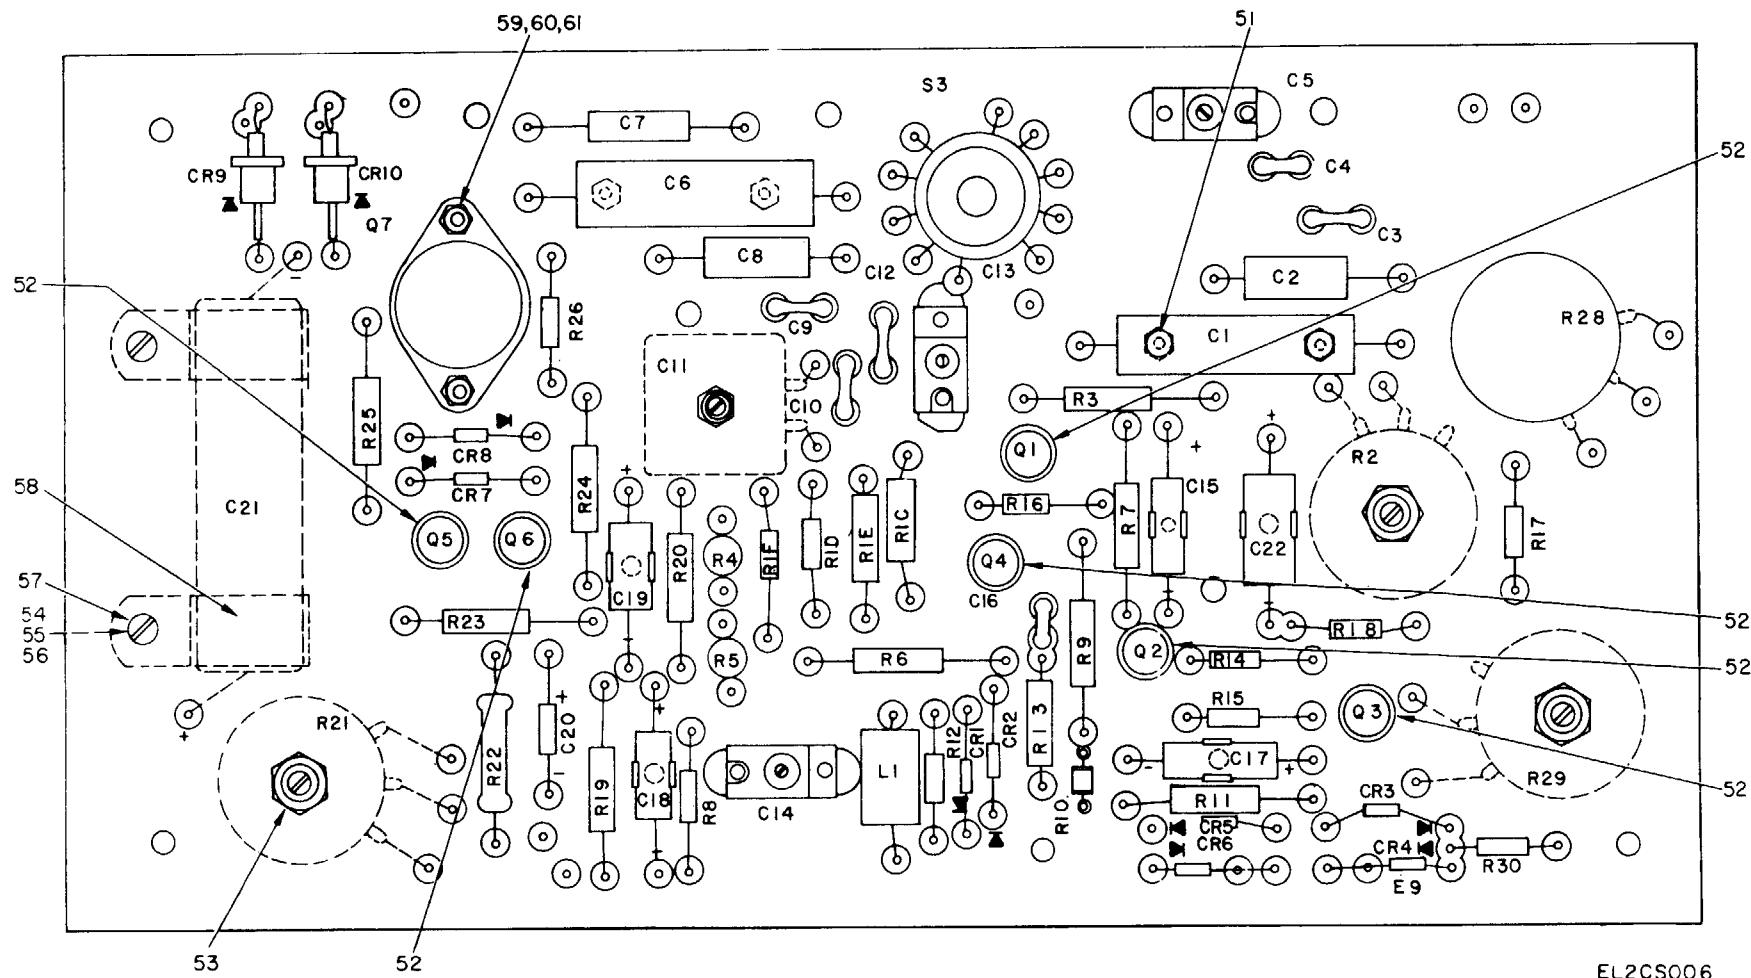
Printed Circuit Board Assembly (Sheet 1 of 2).
